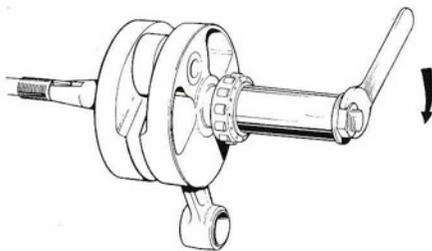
Assembling main bearing inner race to left crankshaft using a length of steel tubing.
